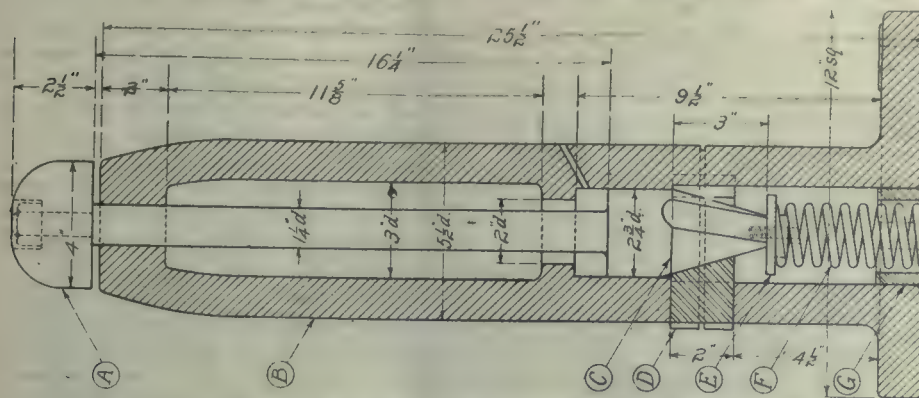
DRILL JIG FOR HOLDING SHELL WHEN DRILLING NOSE.
